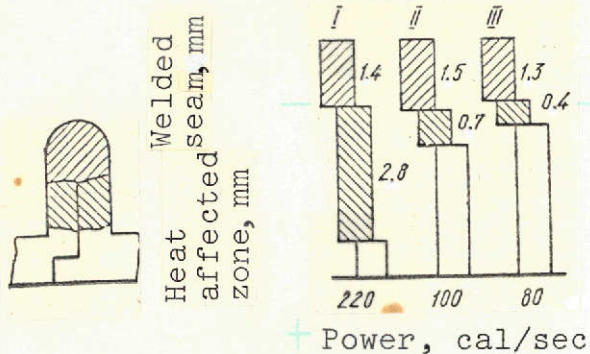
Width of heat-affected zone of 1Cr18Ni10Ti alloy welded joints for different welding techniques.
